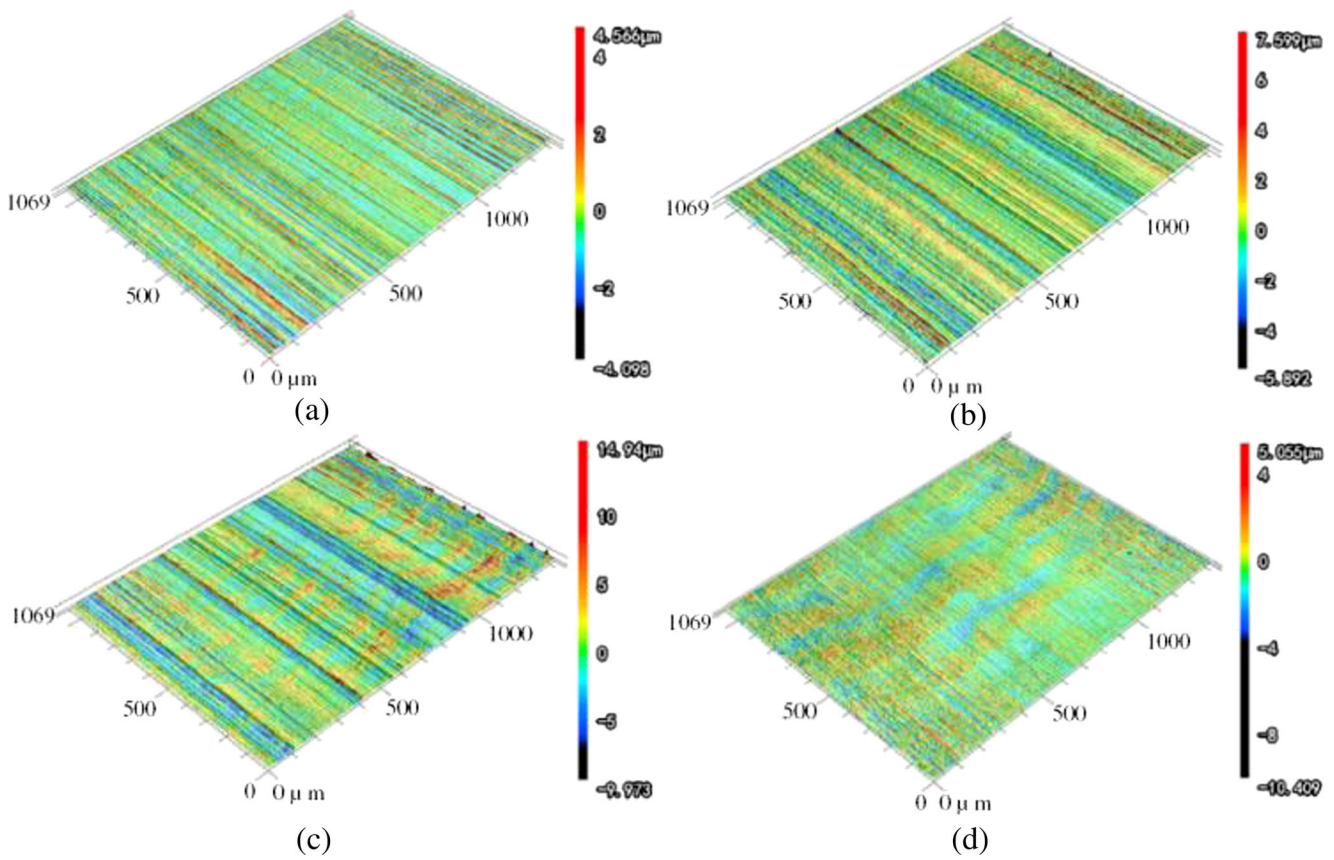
3D surface topographies of Ti6Al4V generated with different tool flank wear states (a) new tool; (b) $VB = 0.1$ mm; (c) $VB = 0.2$ mm; (d) $VB = 0.3$ mm [152]
